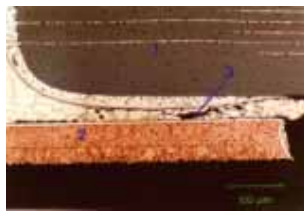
Multilayer capacitor (1) soldered onto a copper metallization of the circuit board (2). Fatigue crack (3) continuously propagating through solder
